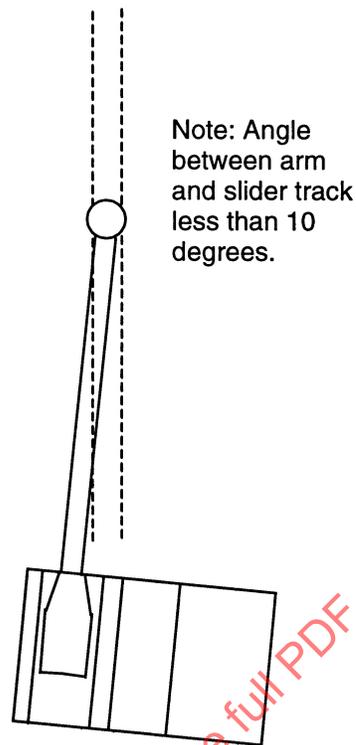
CALIBRATION FIXTURE—SIDE VIEW
